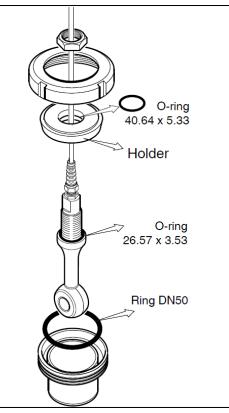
ISC40 sensor in weld-in sub-assembly ISC40FS-SCWN
